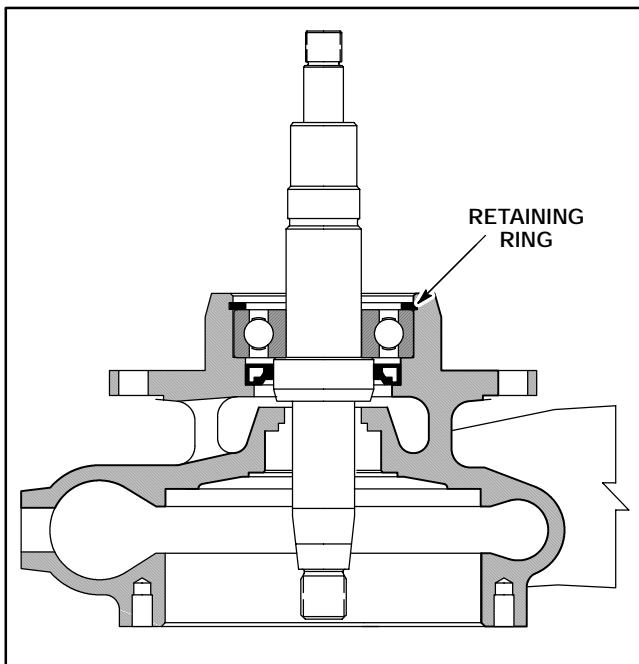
Water Pump Shaft/Bearing Assembly
